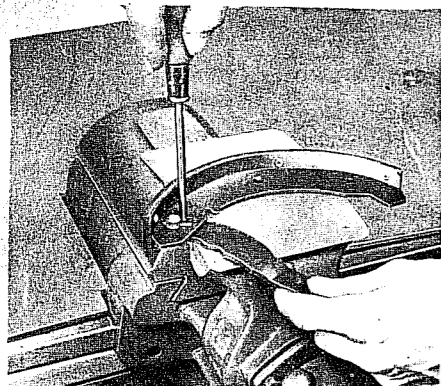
Detaching the handbrake operating lever from the rear shoe.
